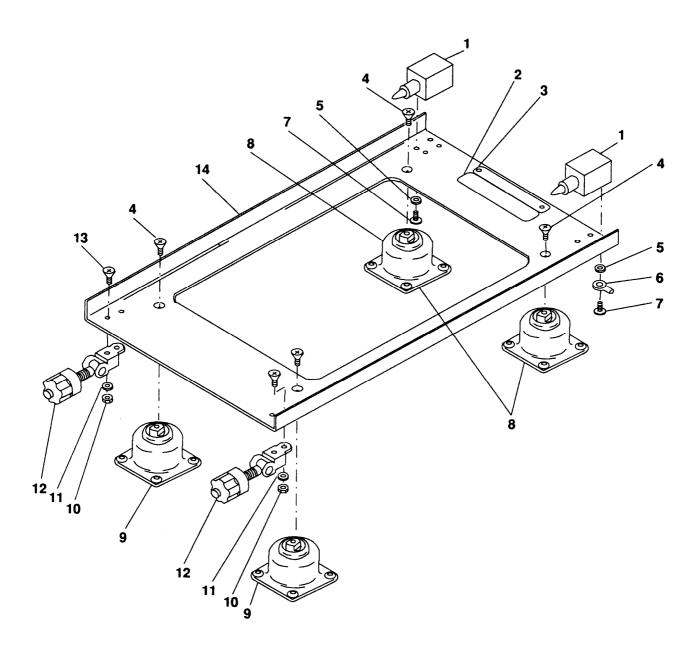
Electronic Equipment Mounting Base Assembly MT-6678/ARS-6
